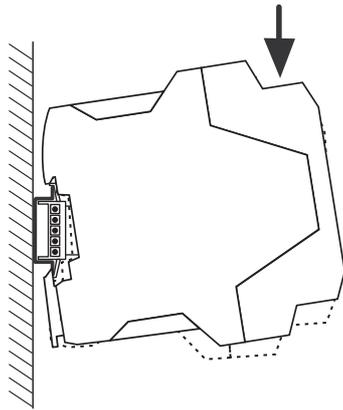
Mounting a MSI 100/200 module on the DIN rail
